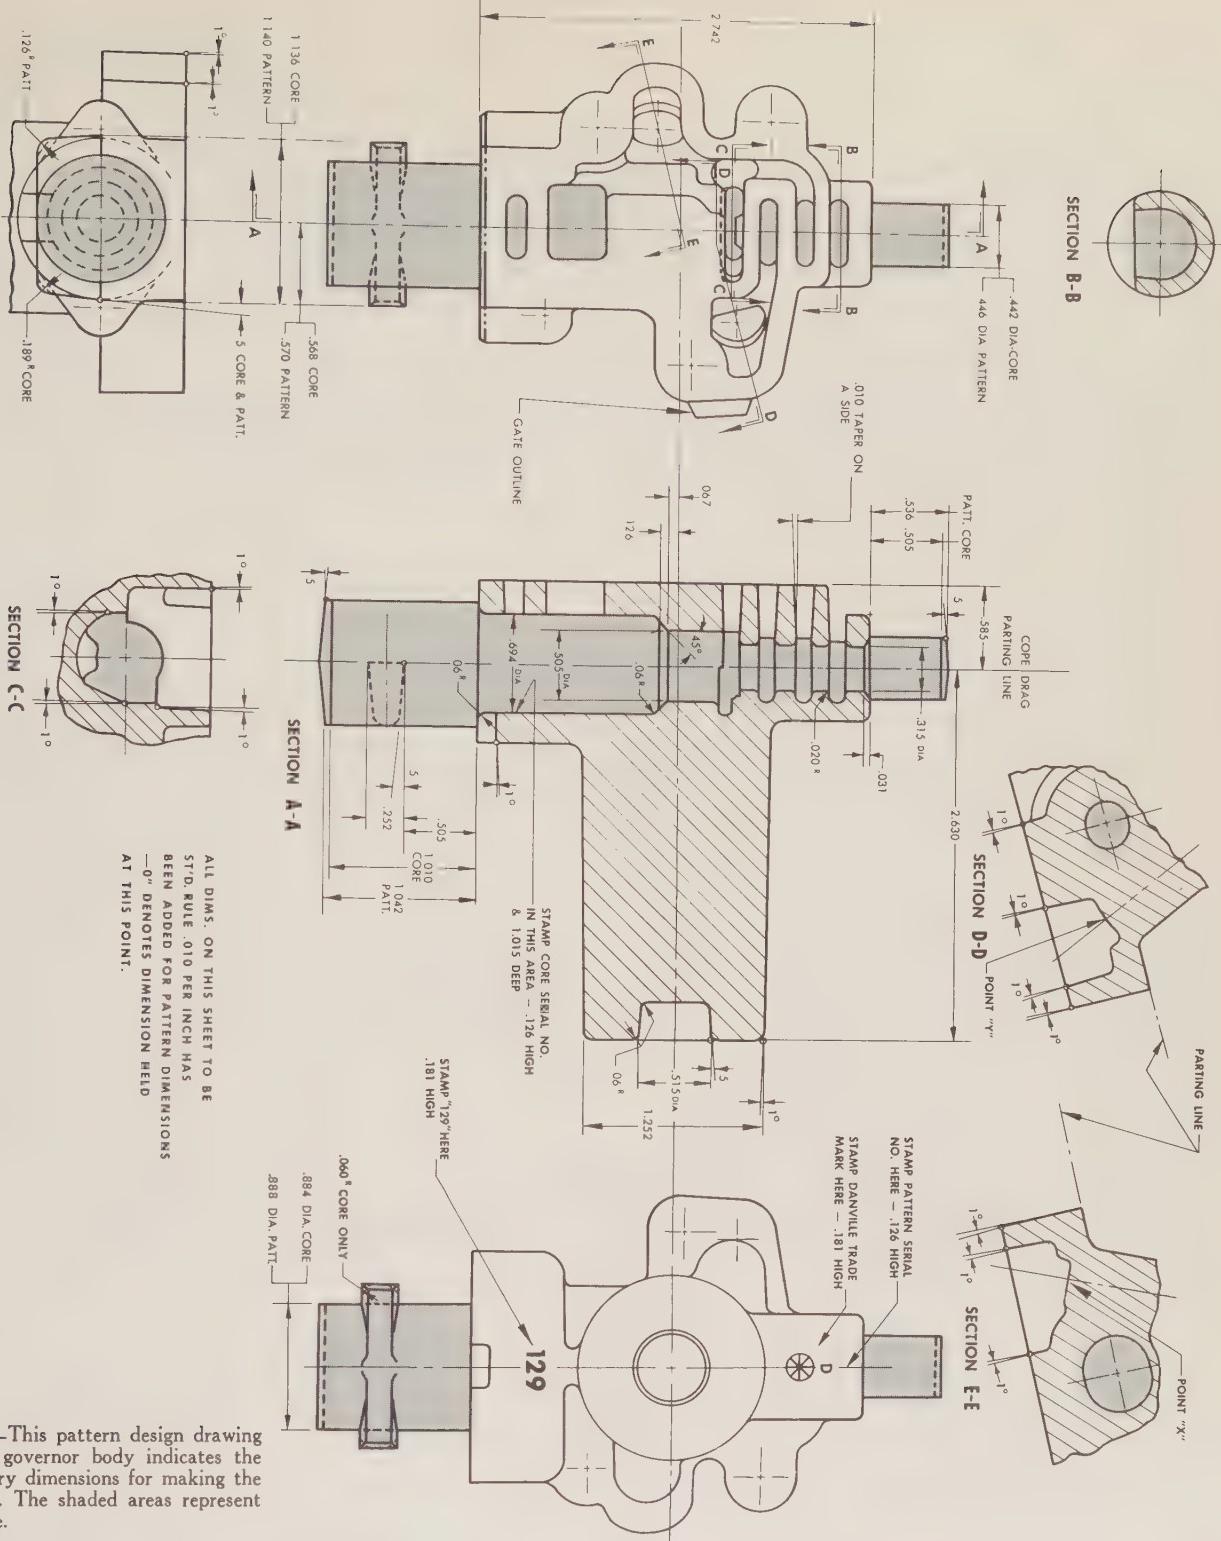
This pattern design drawing of the governor body indicates the necessary dimensions for making the pattern. The shaded areas represent the core.
